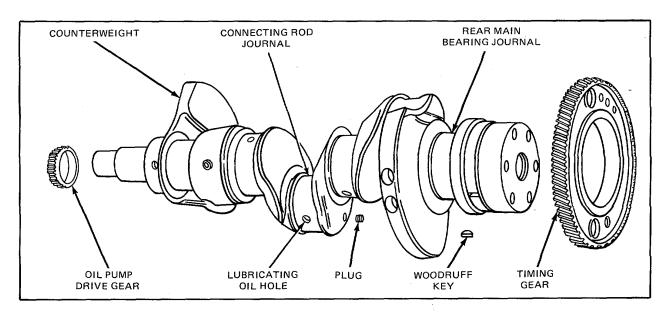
Crankshaft Details and Relative Location of Parts (Three-Cylinder In-Line Engine Crankshaft Shown)
